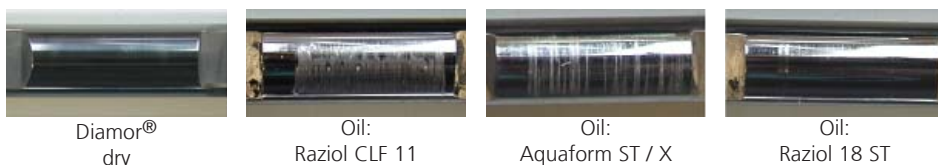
Tools after drawing tests with AlMg5Mn strips (compare Fig. 2)
